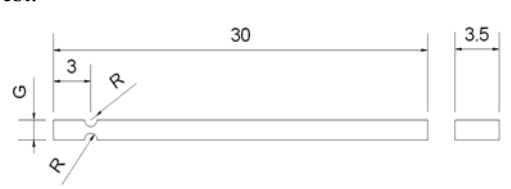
The geometric concept of the compliant joint (dimensions are in mm)
